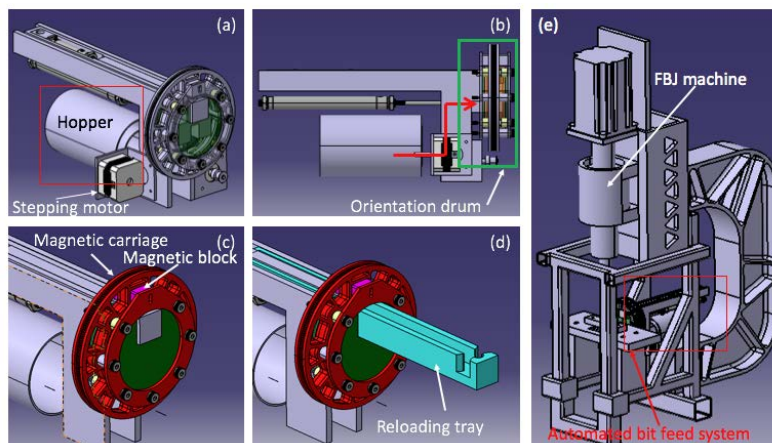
Three-dimensional drawings of the automated joining bit feed system: (a) hopper, (b) orientation drum, (c) magnetic carriage and block, (d) reloading tray, and (e) isometric view of the whole system.
